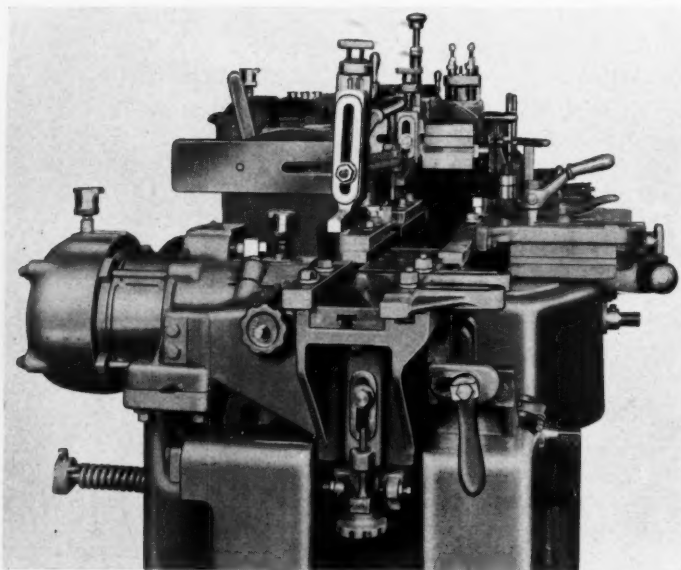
Above—View from feed-out end shows type of construction and heavy horizontal spindle mounting
